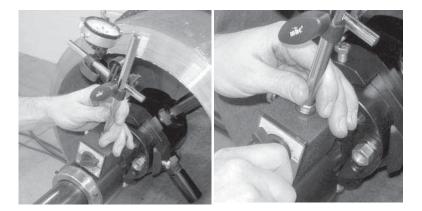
Set the magnetic base of the indicator on the collar, and turn the switch on to engage the magnet.
